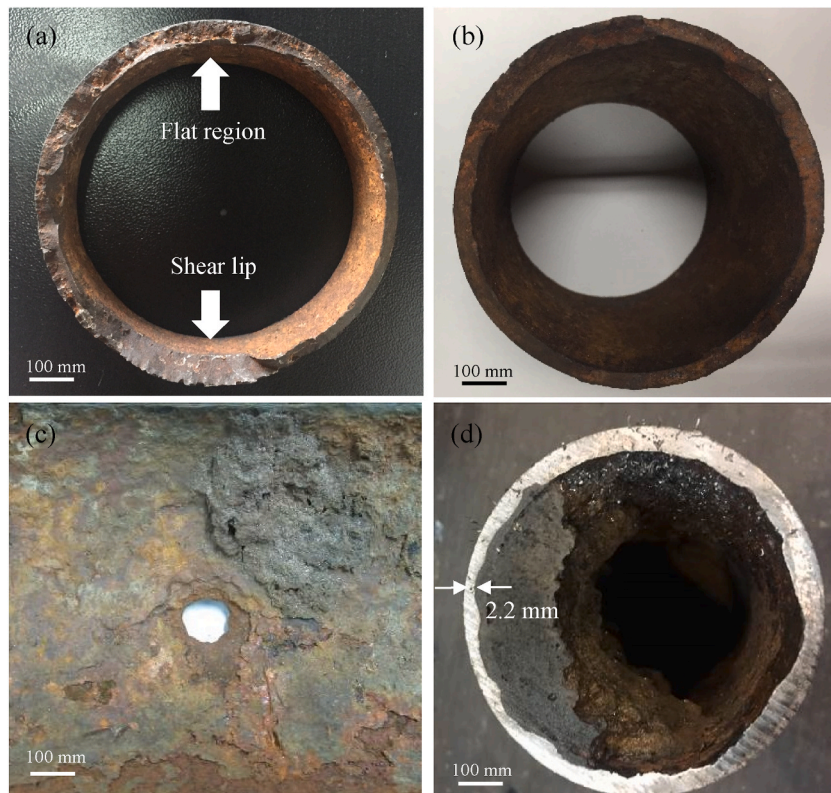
Macroscopic morphology of fracture and perforation (a) Macroscopic fracture morphology of 1 # tube; (b) Macroscopic fracture morphology of 2 # tube; (c) Inner surface morphology of perforation site; (d) Internal scaling morphology of perforated tubing.
